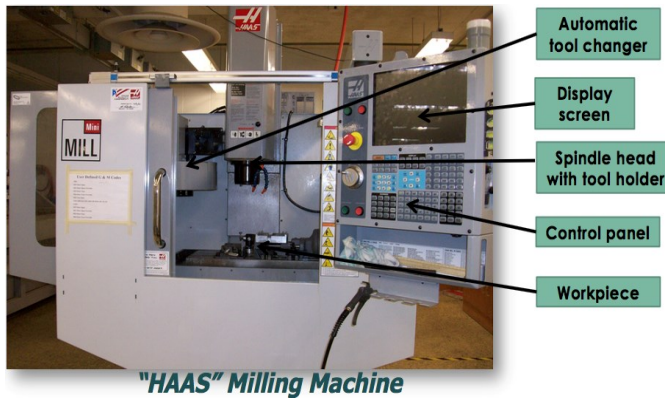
Photograph of the Machine Tool (Hass Mini Mill) Used to Perform the Machining Experiments
